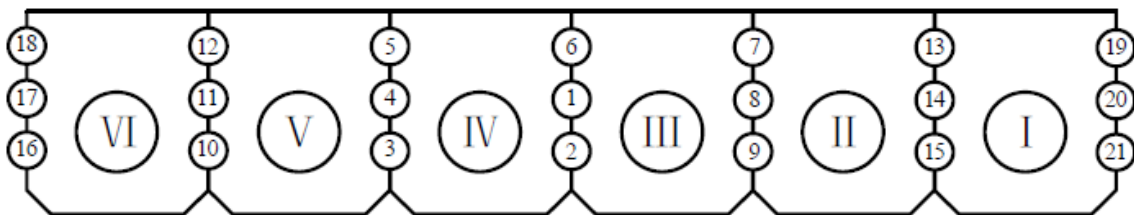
Tightening Sequence of Cylinder Head Bolt
